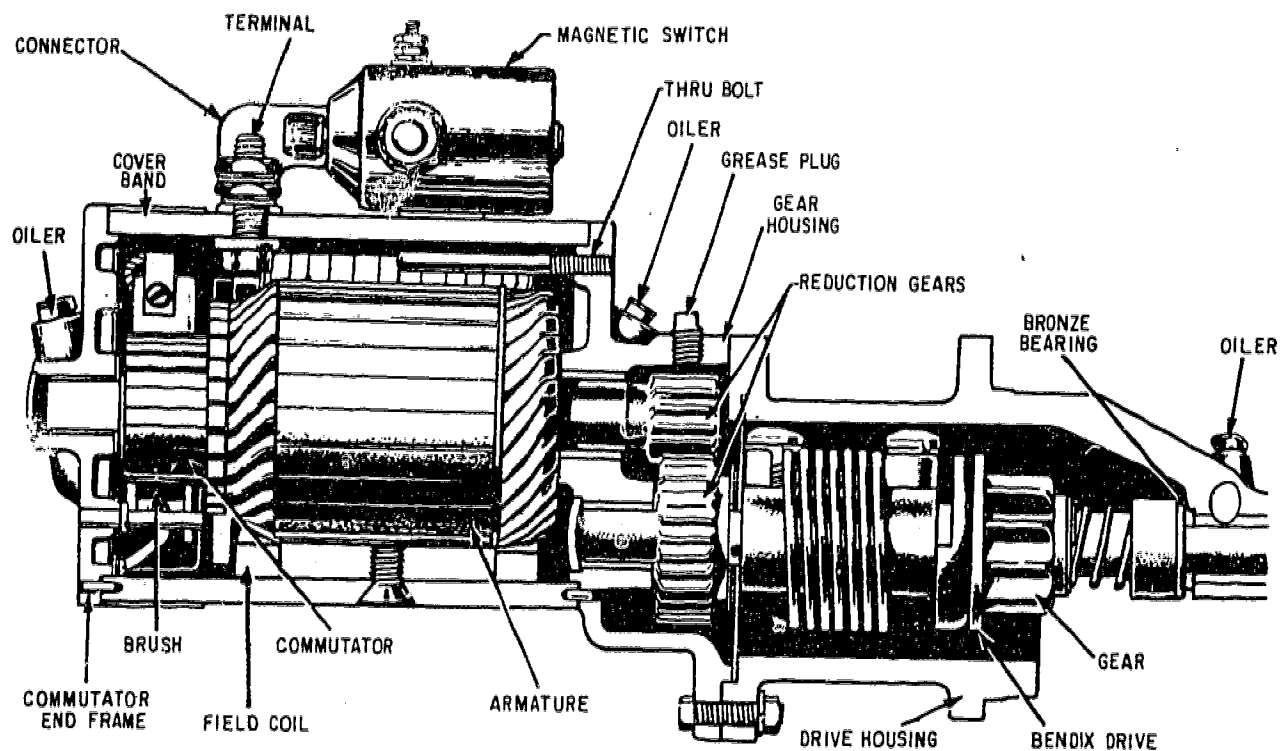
Sectional view of a heavy-duty starting motor.
